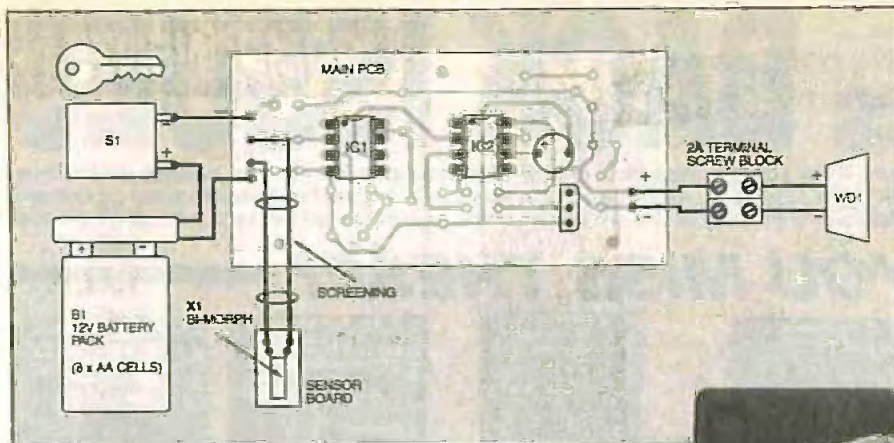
Interwiring between the circuit board and the off-board components, including the bi-morph board.
